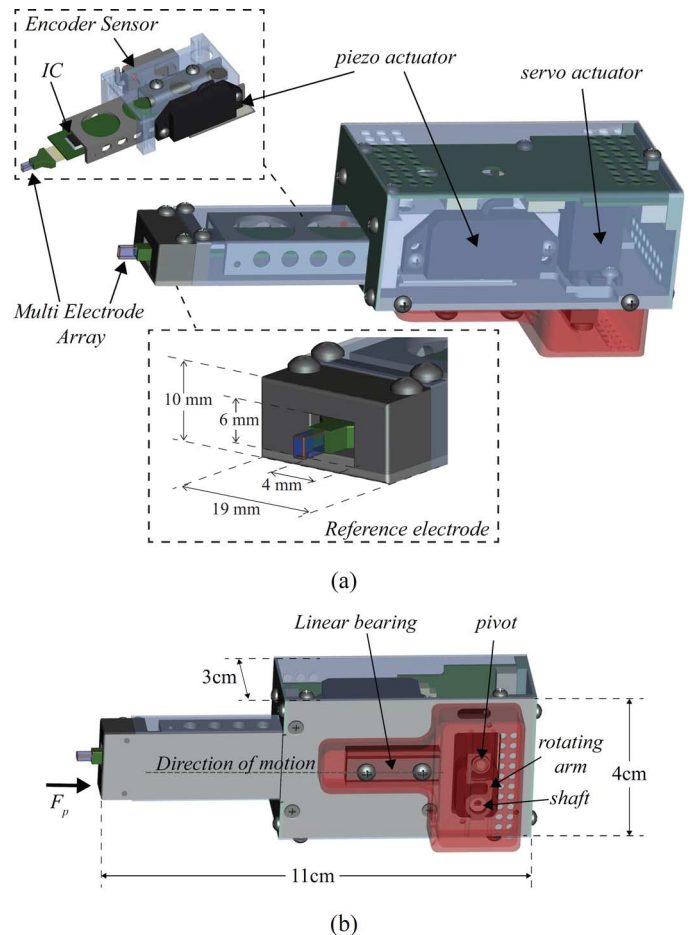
Detailed view of the headstage. (a) Side view. (b) Bottom view.
